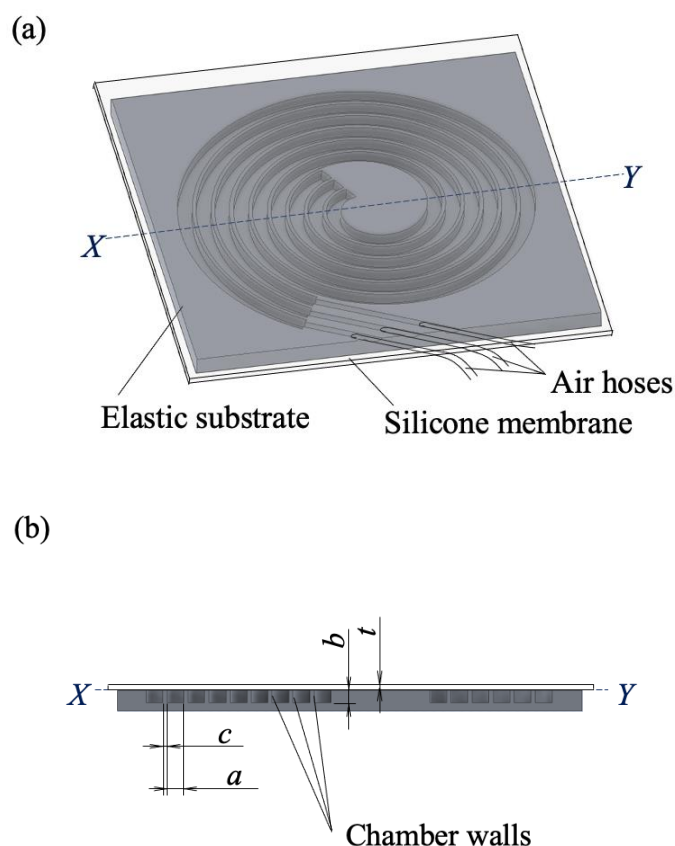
Design of the spiral actuator: (a) Top view; (b) cross-sectional view
